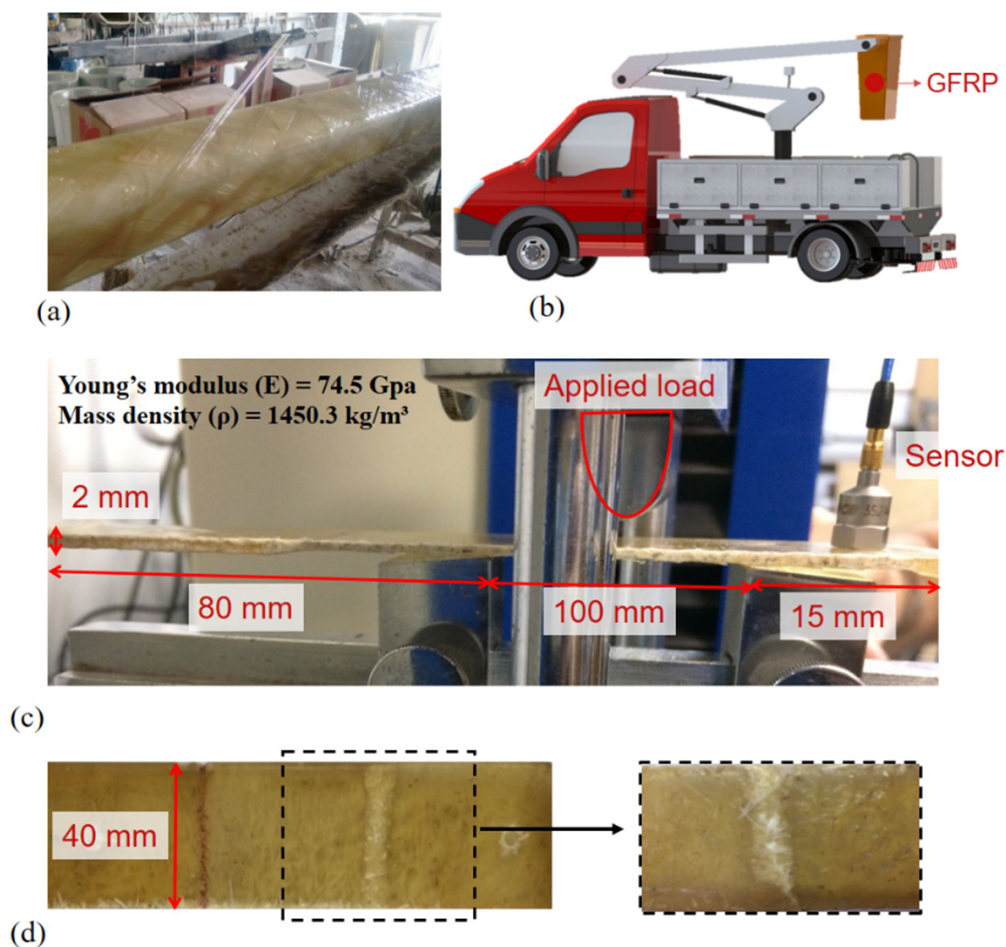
(a) Specimen manufacturing; (b) GFRP application example; (c) The sample dimensions and test conditions; (d) The ruptured specimen final configuration with a detailed view of the fracture.
